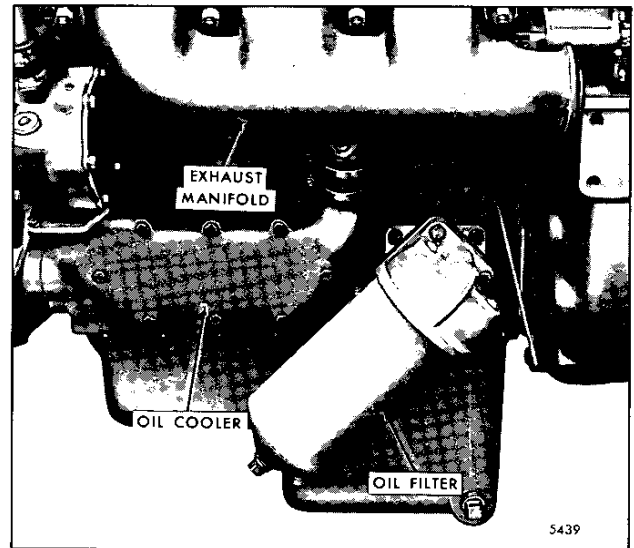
Typical Full-Flow Oil Filter Mounting (6V Engine Shown)
